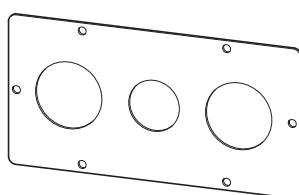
Gland plate with holes for cable glands (FS4, FS5)
